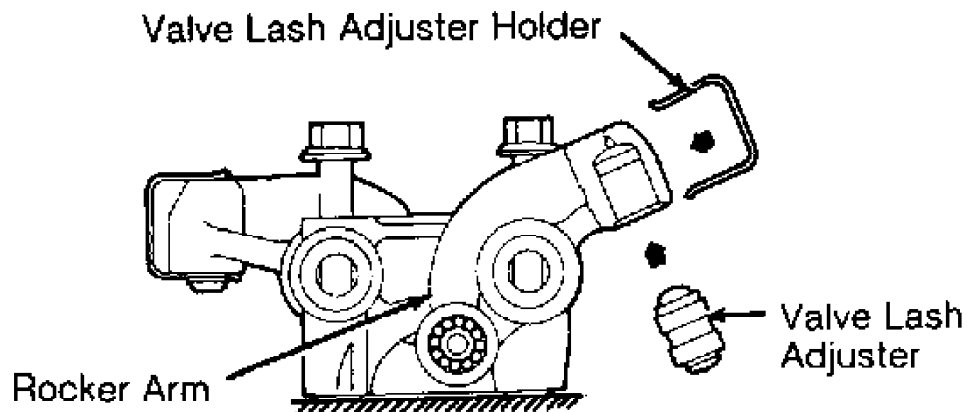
Installing Valve Lash Adjuster Holder (SOHC)
